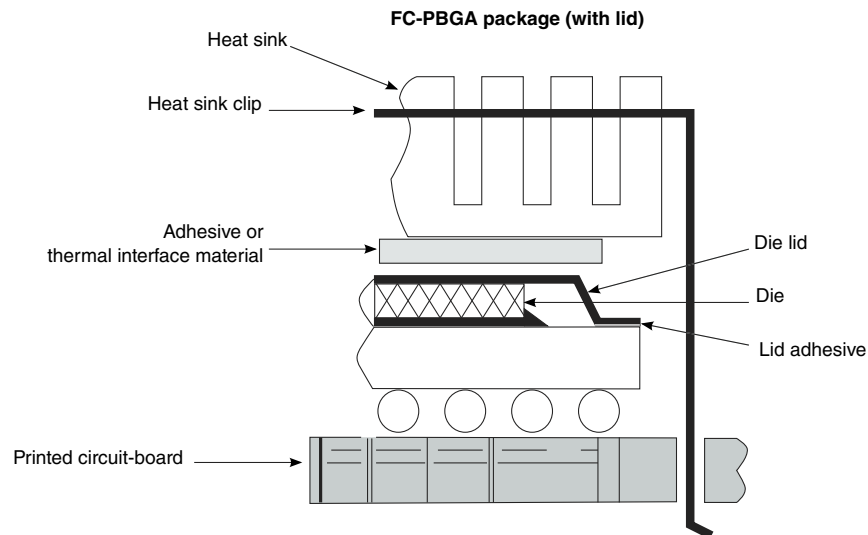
Package exploded, cross-sectional view-FC-PBGA
